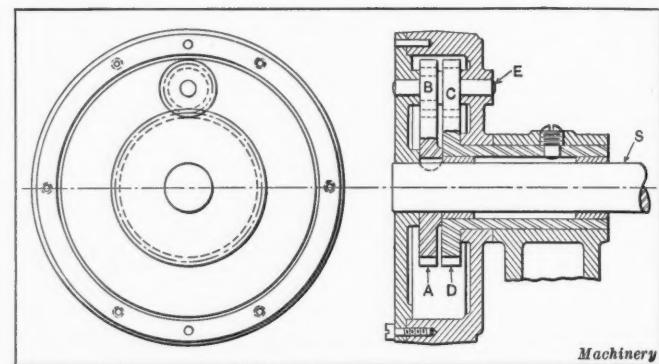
Epicyclic Gear Train consisting of Two Central Gears (One of which is stationary) and an Arm which carries Two Planetary Gears
